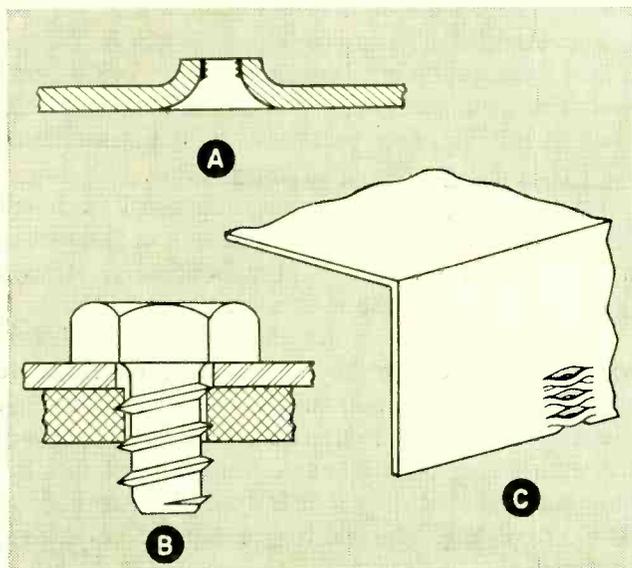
Holes extruded in sheet metal can be threaded (A), self-tapping screws utilized (B) or the chassis lanced at its edge (C)
